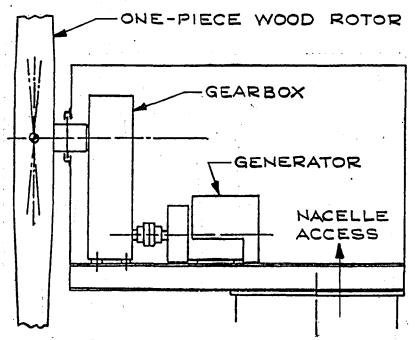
Concept 3: Gearbox on-end with the low speed shaft on top, and the rotor support on an extension of the low speed shaft
